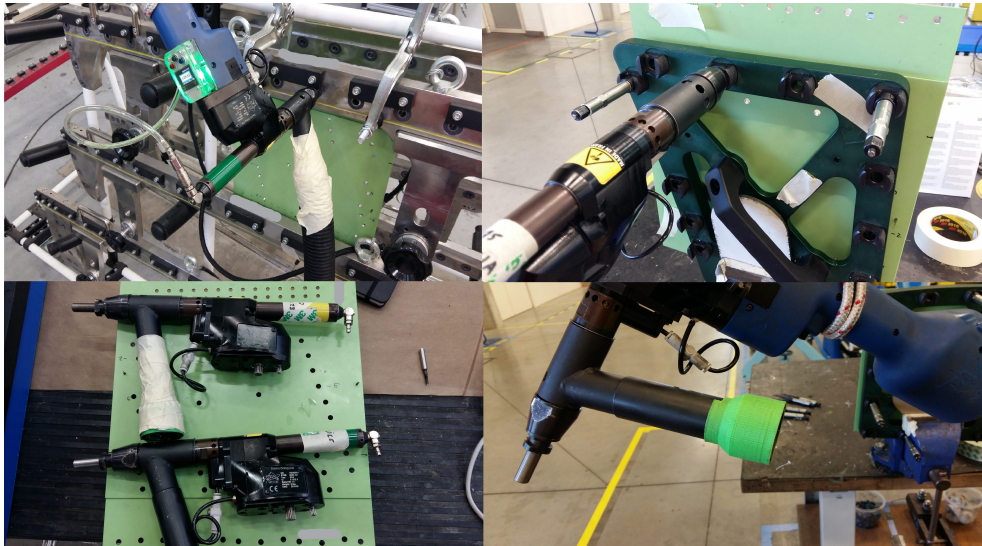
Horizontal stabilizer flap and splice test specimen.
